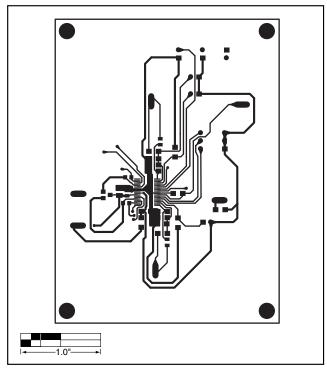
MAX1715 EV Kit PC Board Layout—Solder Side
